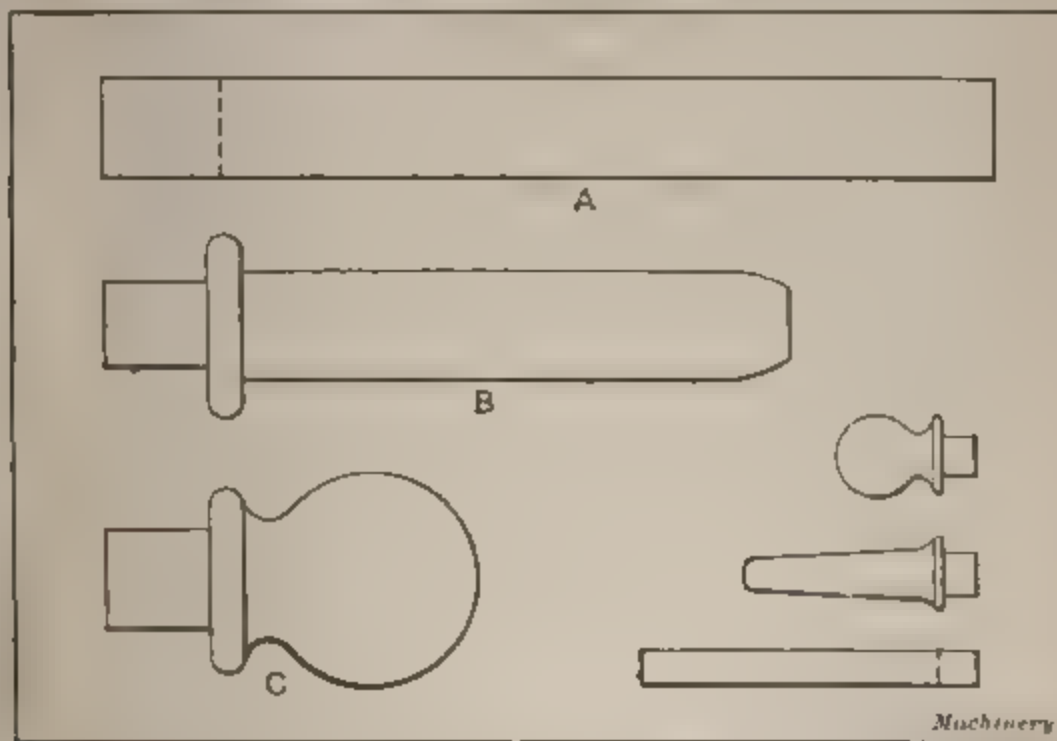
Typical Examples of Reheading requiring an Open-die Machine
